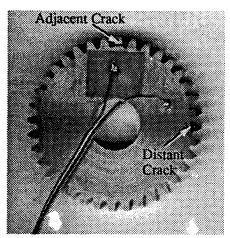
Detection of bending fatigue cracks and abrasive wear in high-precision gears was investigated.
